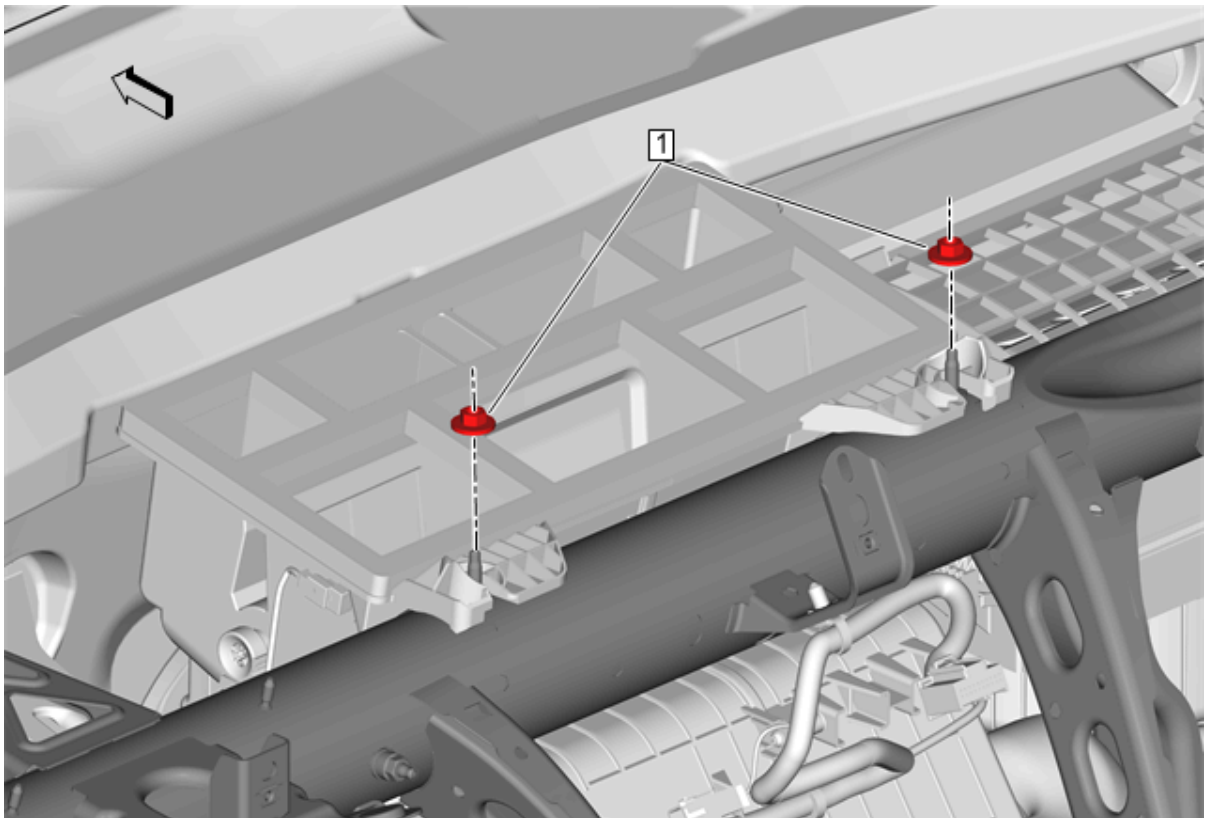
Heater and Air Conditioning Evaporator and Blower Module Nut
